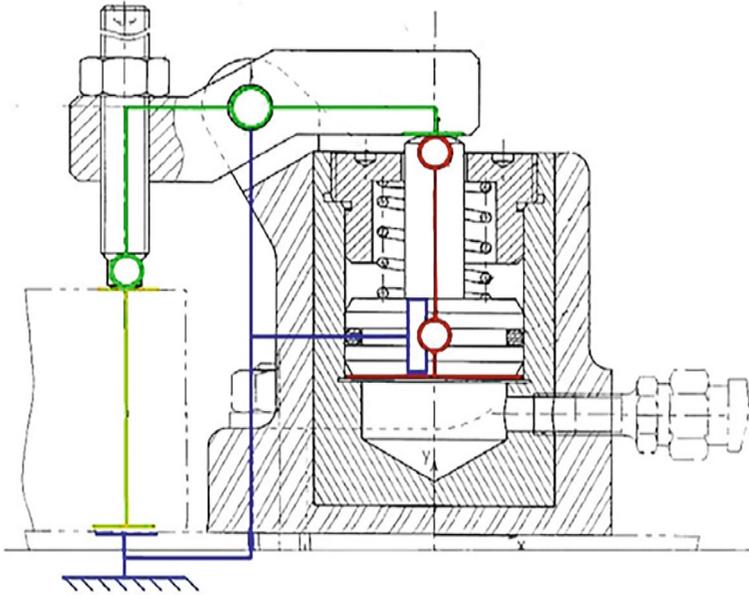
Kinematic diagram superimposed on the drawings of the assembly example. Course on mechanical connections [3]
